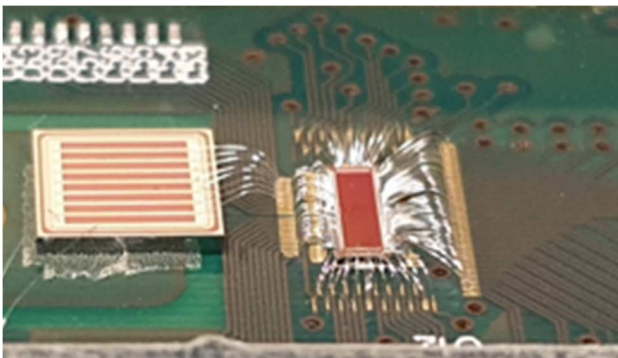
FAST2_EVO1 ASIC and UFSD bonding to the PCB.
